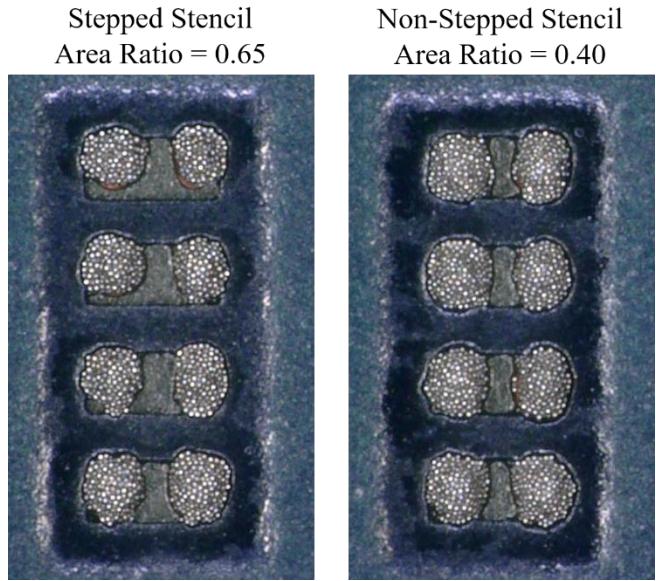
M0201 print deposits from the first assembly test comparing stepped and non-stepped stencil results.
